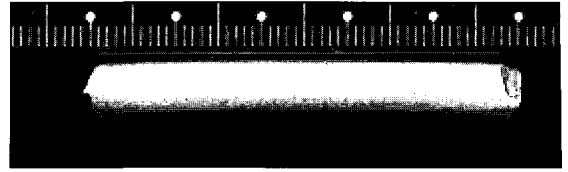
Specimen of the Al-1%Si wire by continuous casting
